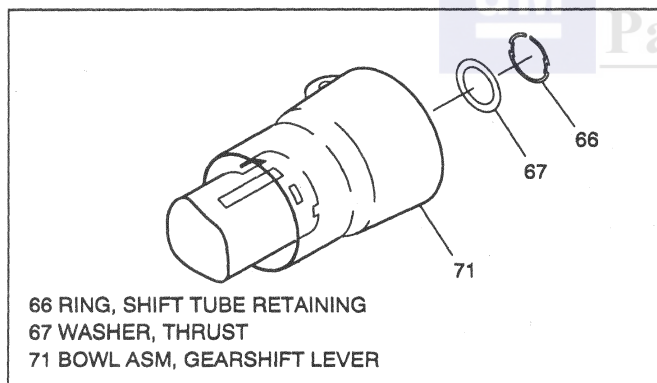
Installing Shift Tube Retaining Ring, Thrust Washer
